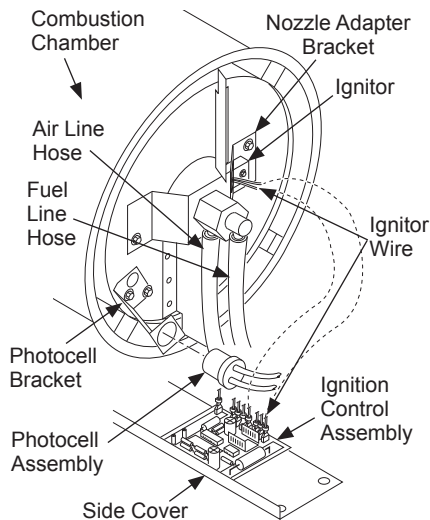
Disconnecting Ignitor Wires from Ignition Control Assembly
